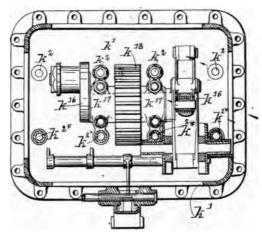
Clarkson steam omnibus. Transverse section of crank chamber, showing crank shaft and valve gear.
